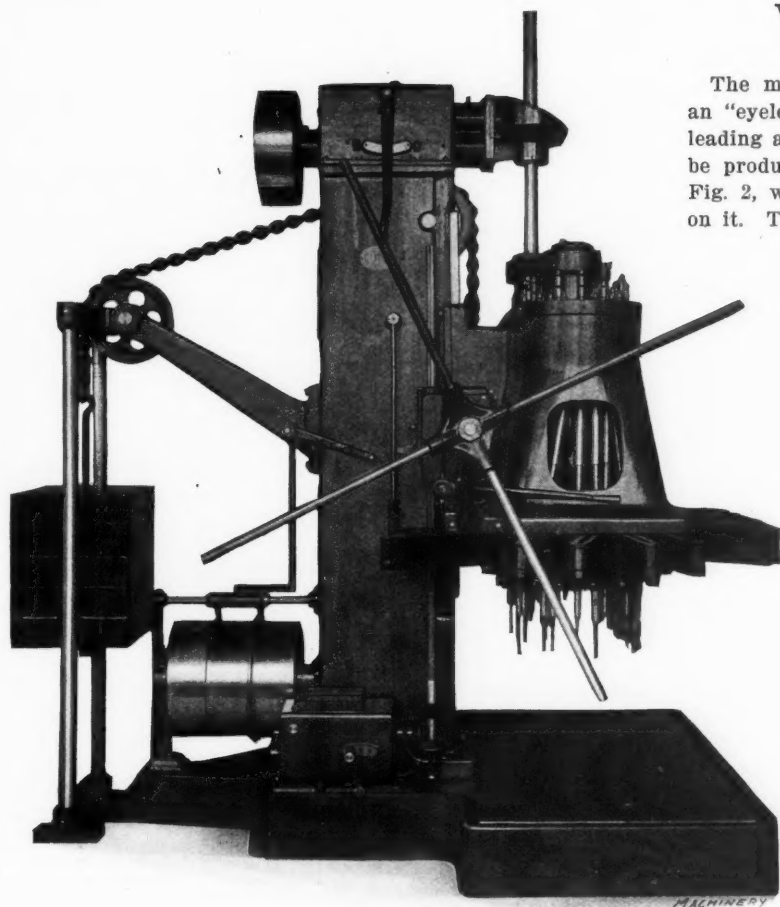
Side View of "Natco" Drill shown in Fig. 1
